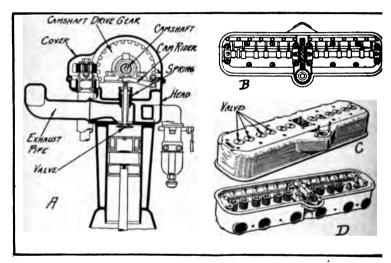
Sectional View Showing Construction of Premier-Weids Overhead Valve, Detachable Cylinder Head Motor.
